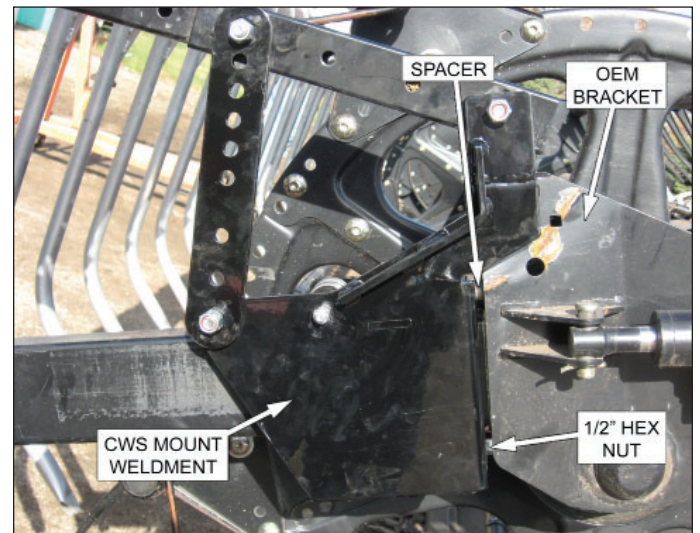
Left hand reel arm (FD70 & CIH 2162 headers)
